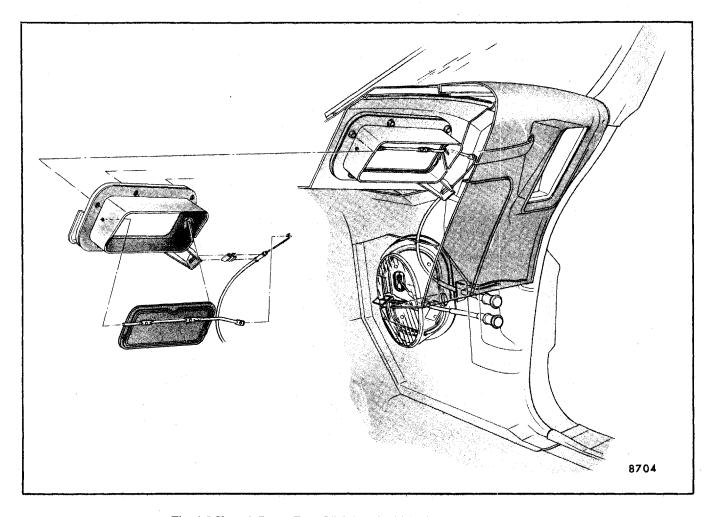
Shroud Center Duct High-Level Air Outlet and Door - F Styles
